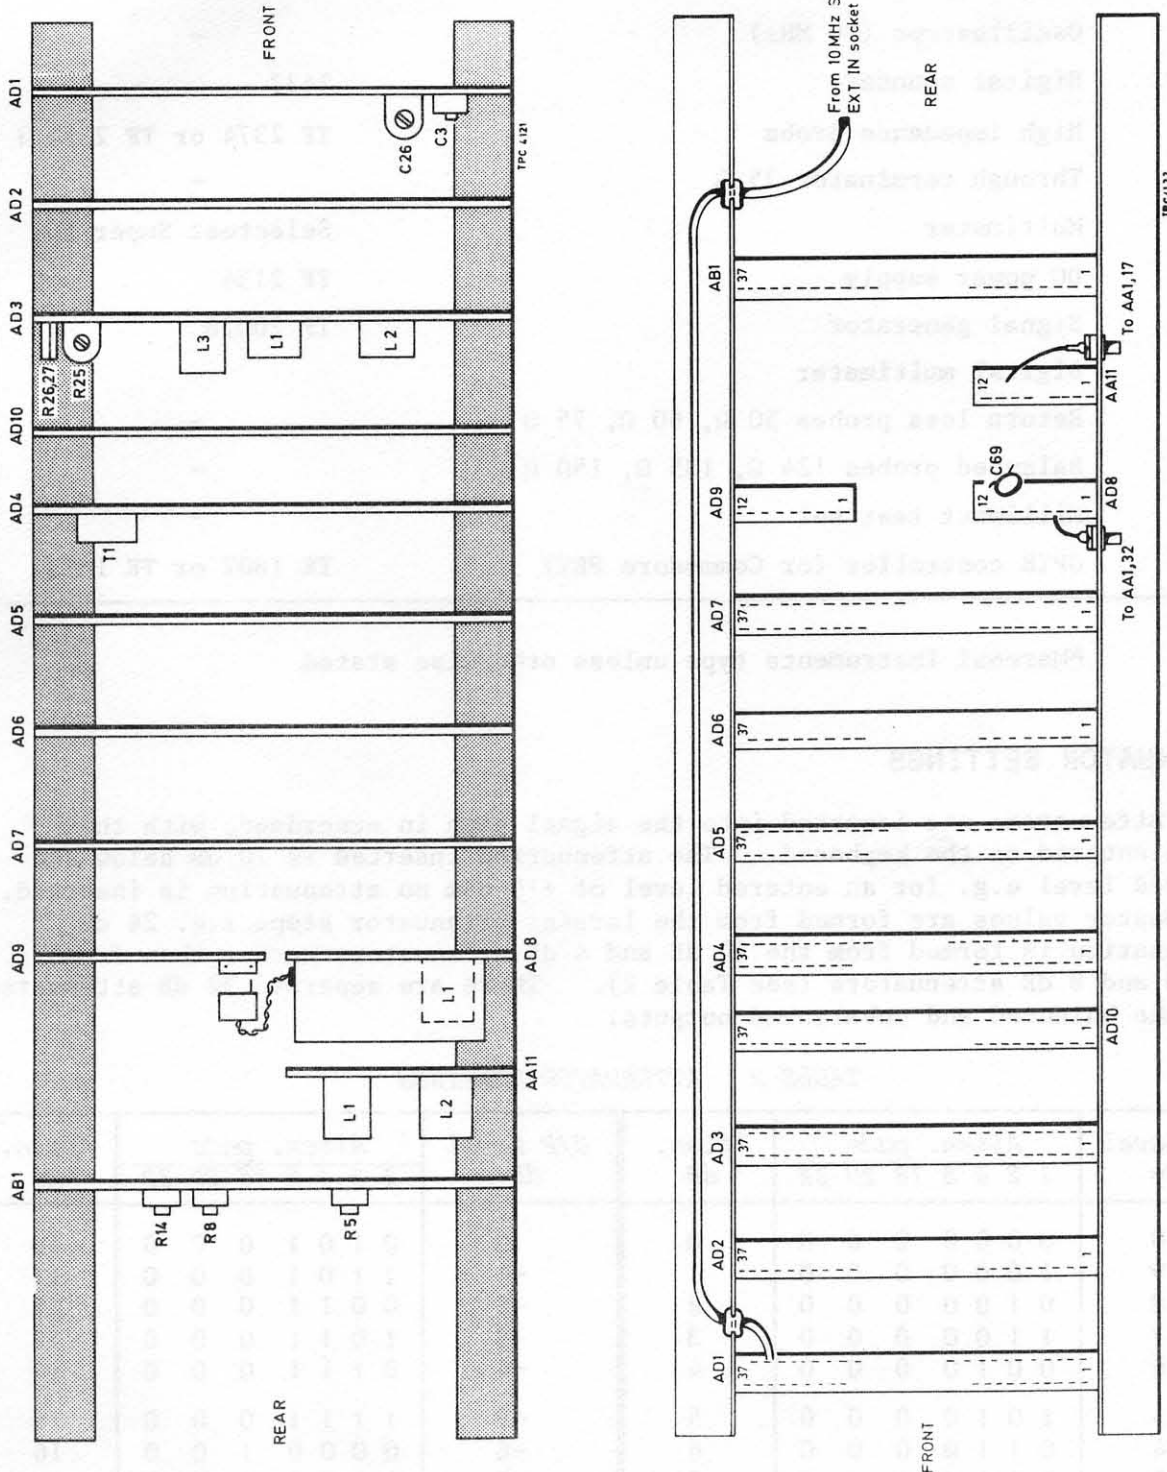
Local oscillator unit assembly. Views of top (above) and bottom (below) of instrument showing board locations and accessible adjustment points
